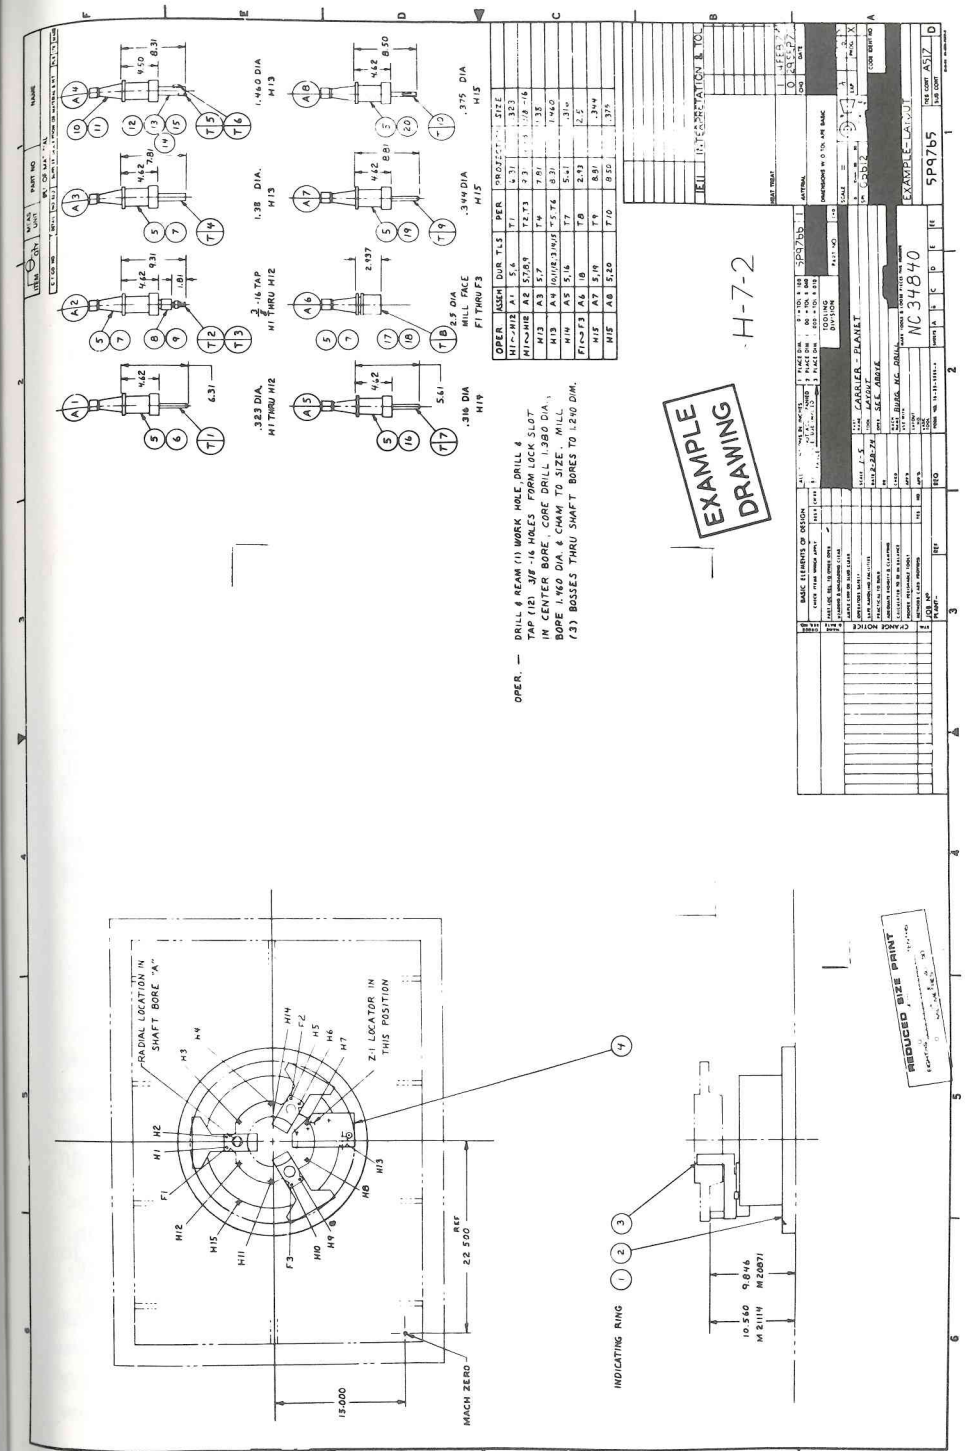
Sample tool layout. Numerical Control Society, Glenview, IL
